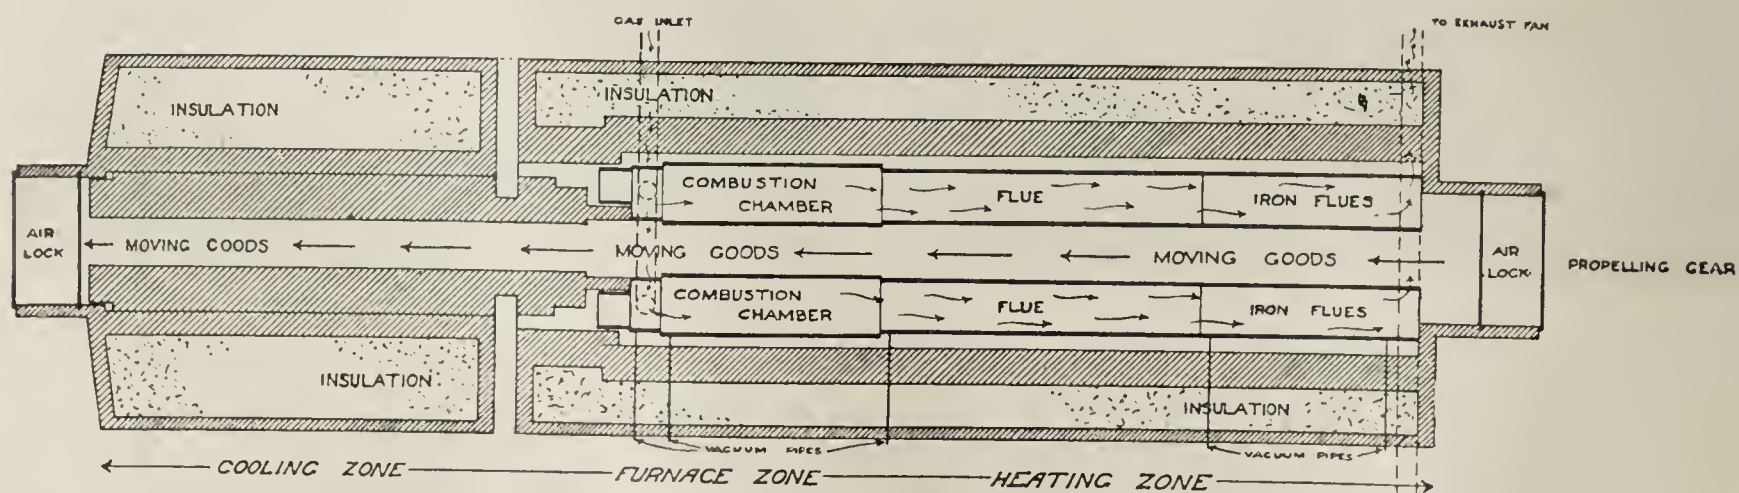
, Showing the Working Plant of Tunnel Kiln. To Make Drawing Clearer, the Transverse Scale Was Made Three Times Larger than Longitudinal Scale.
